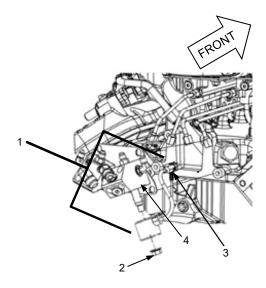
Fuel By-pass Solenoid (1) with Electrical Connector (3) and Retaining Nut (2); Passenger side Fuel Distribution Block (4)
